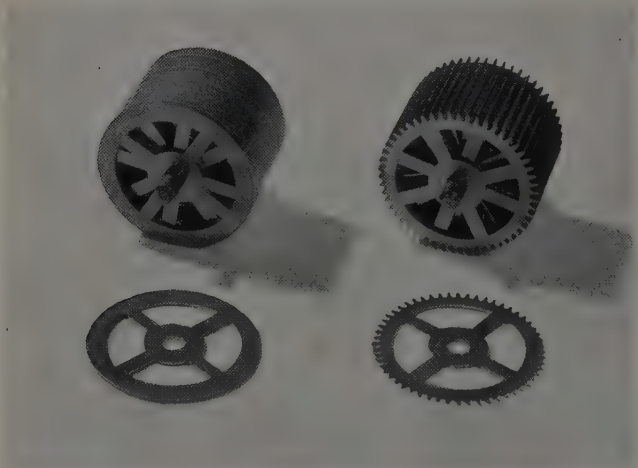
One Method of Producing Clock Wheels. Actual size.
